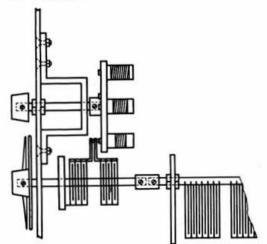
Diagram of suggested coil turret assembly. The actual layout will depend on the type of components available.
